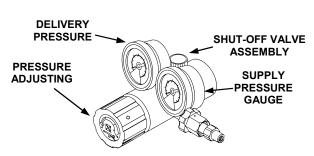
Piston Type Pressure Regulator Controls and Gauges
